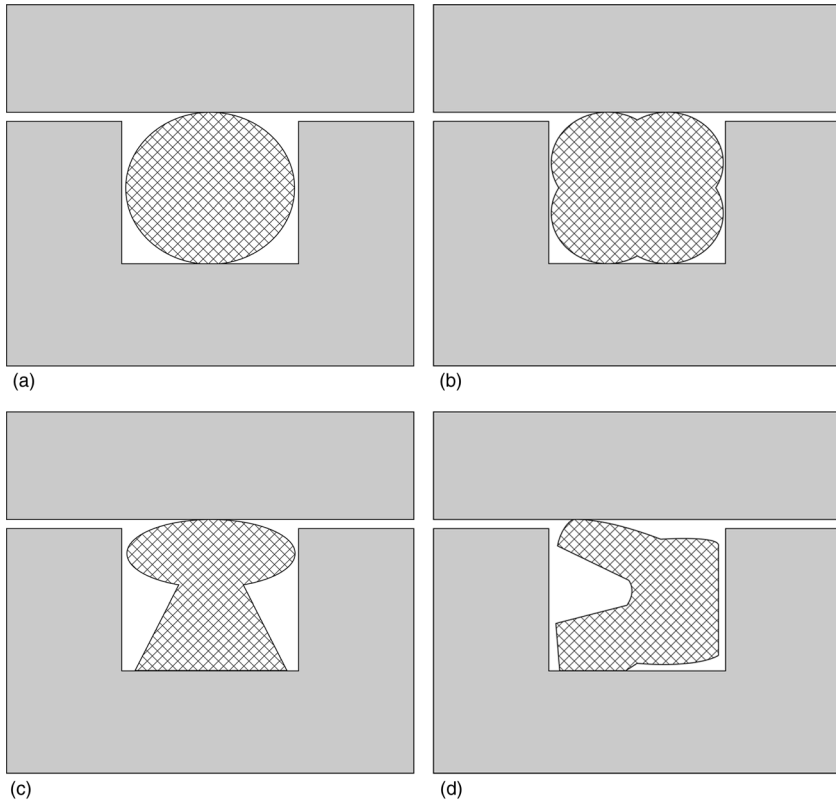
Elastomer seals: O-ring (a), quad ring (b), I-ring (c), groove ring (d).
